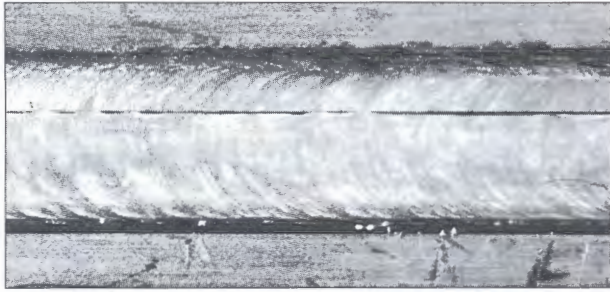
View of the weld face with a defect of lack-of-fusion type made by FSW on aluminium alloy AMg6M 2 mm thick ( $\times 2$ )
